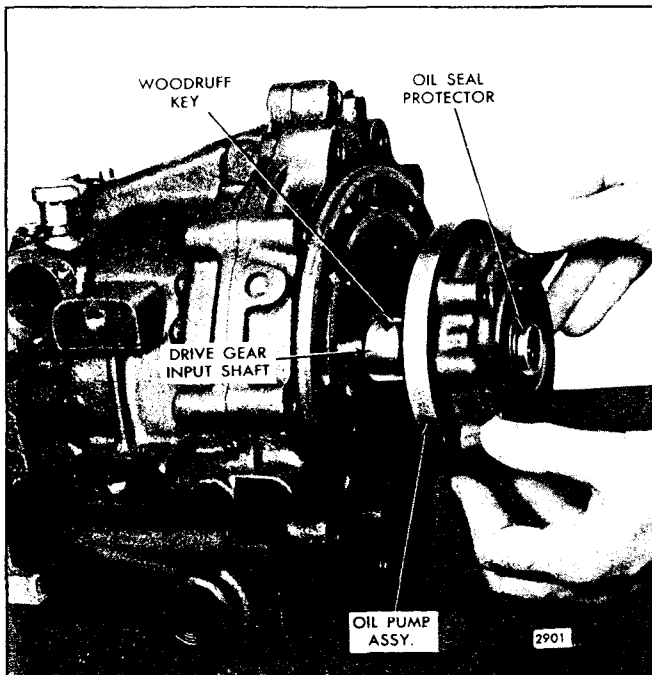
Installing Oil Pump Assembly on Input Shaft and Adaptor
